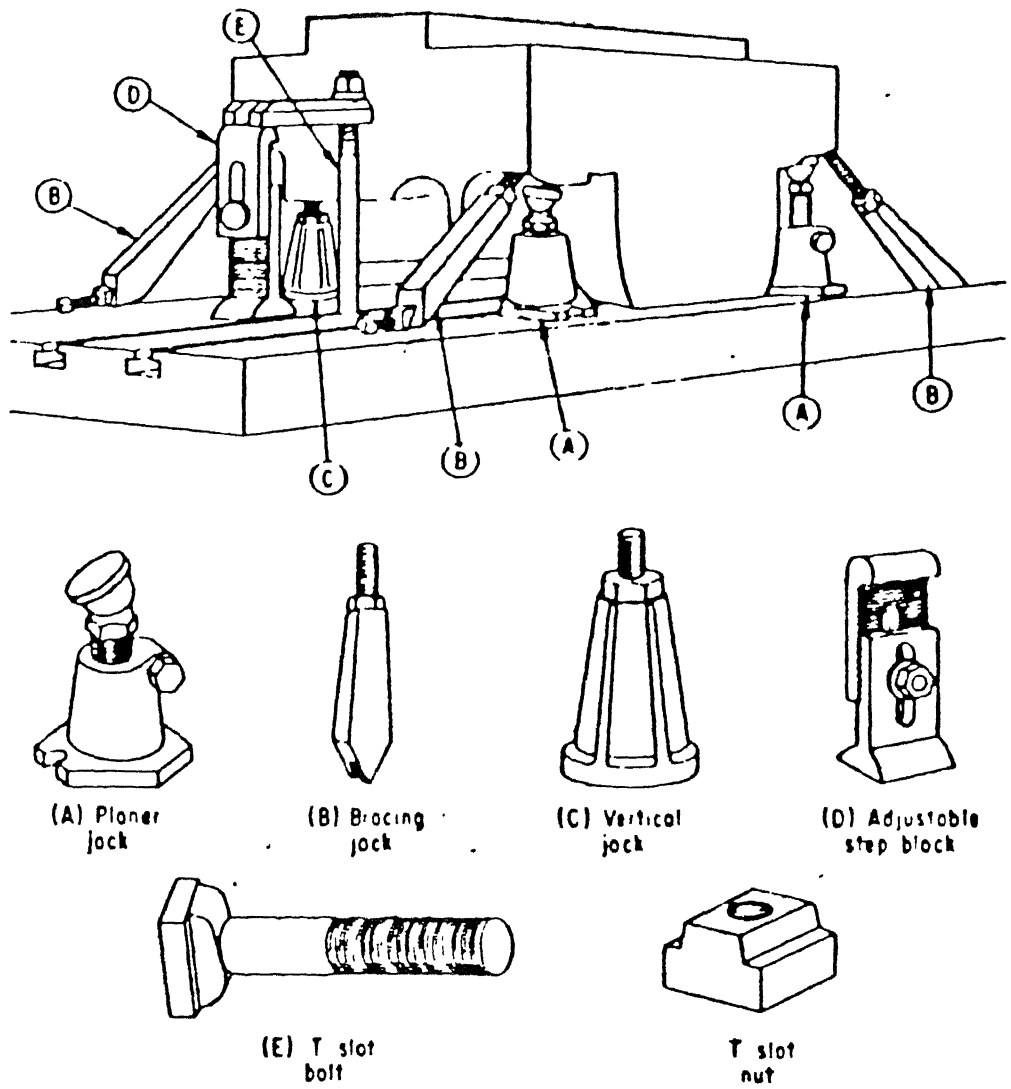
Commercial Components used to hold a large workpiece [ASTME (1987)]
